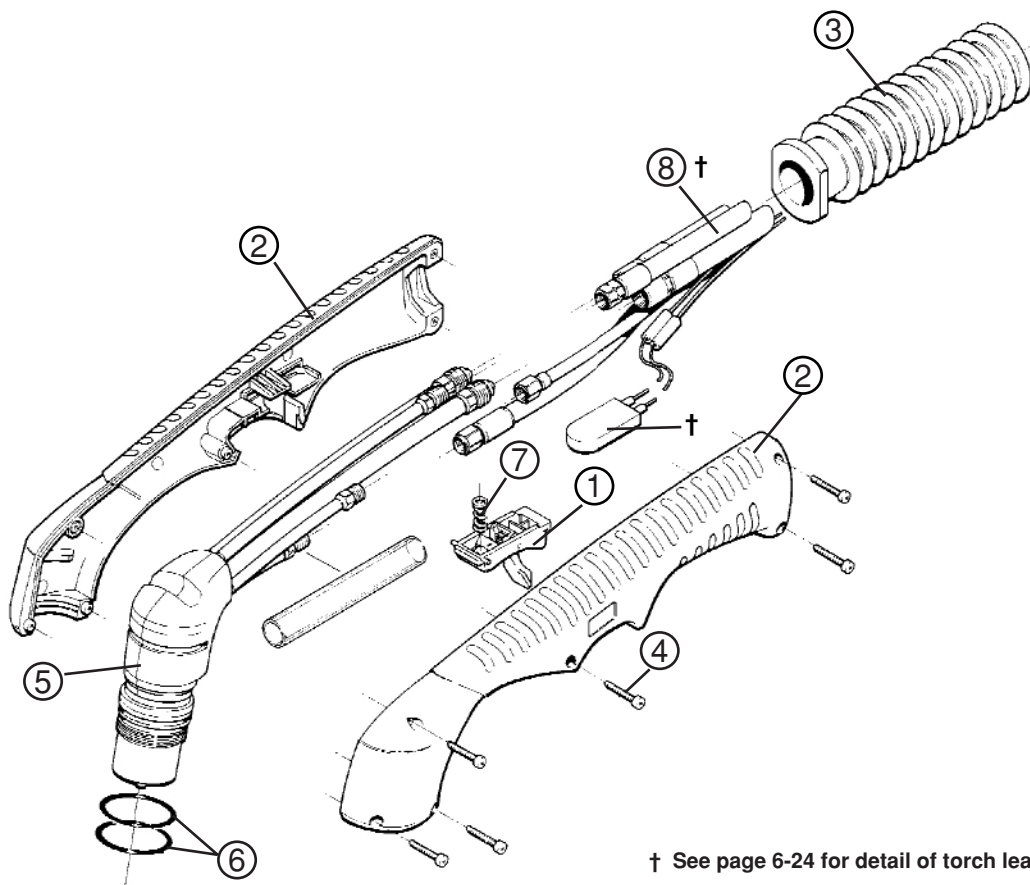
PAC200T (90°) Cutting Trigger Torch Assembly
